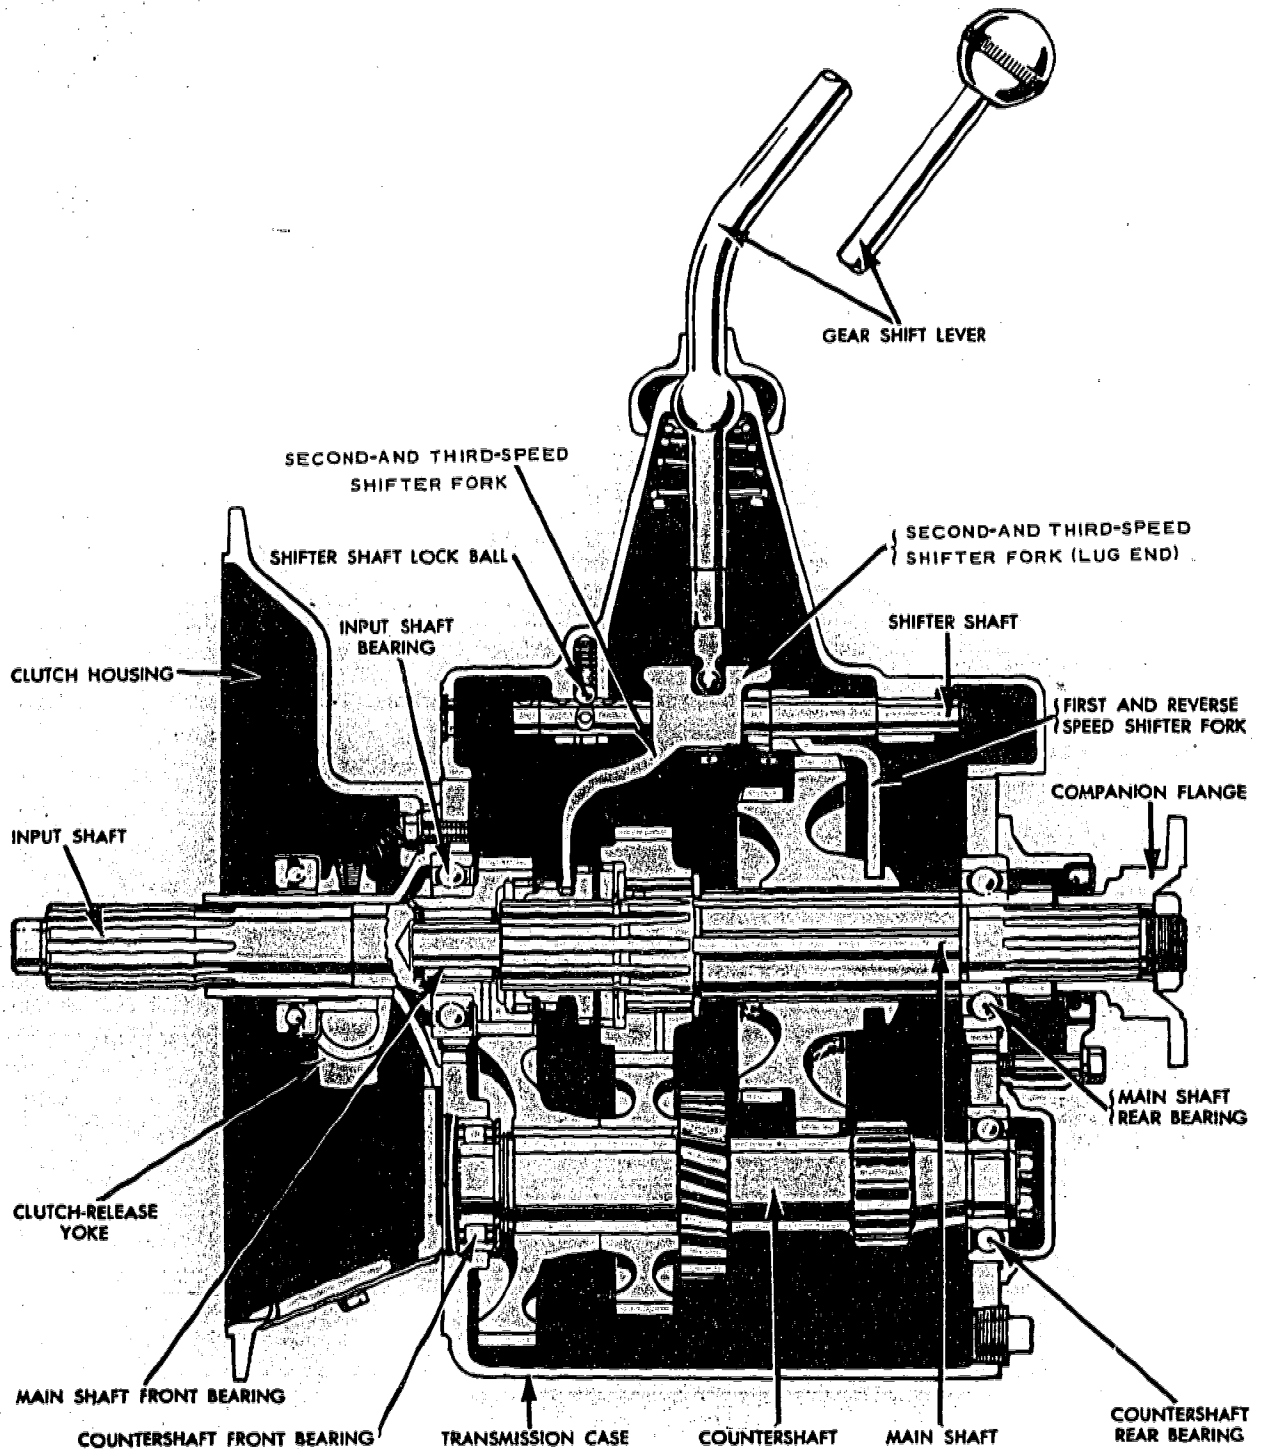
Cutaway view of a constant-mesh transmission assembly.
